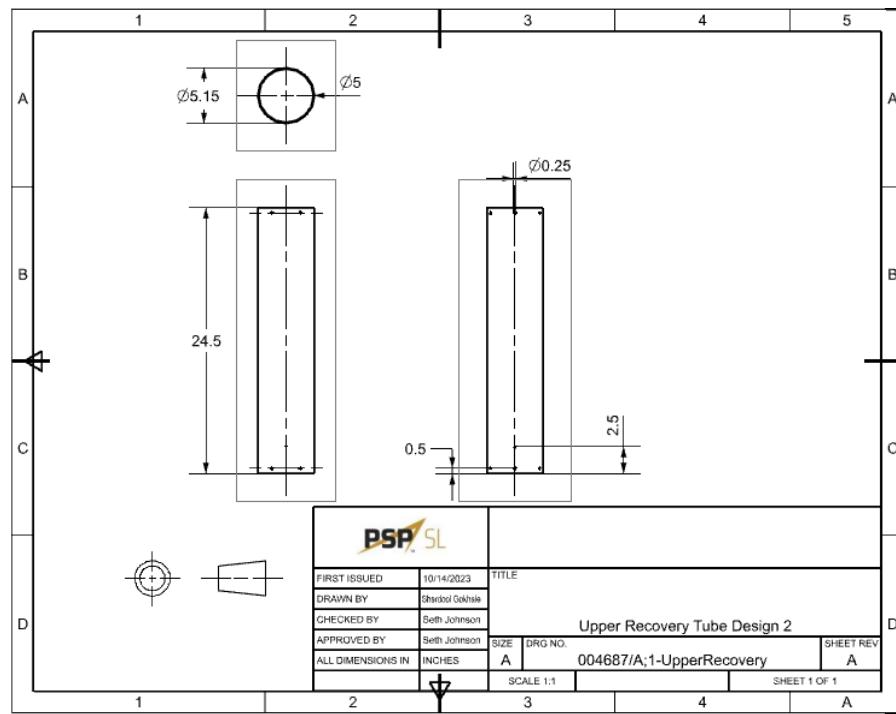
Upper Recovery Airframe Technical Drawing
